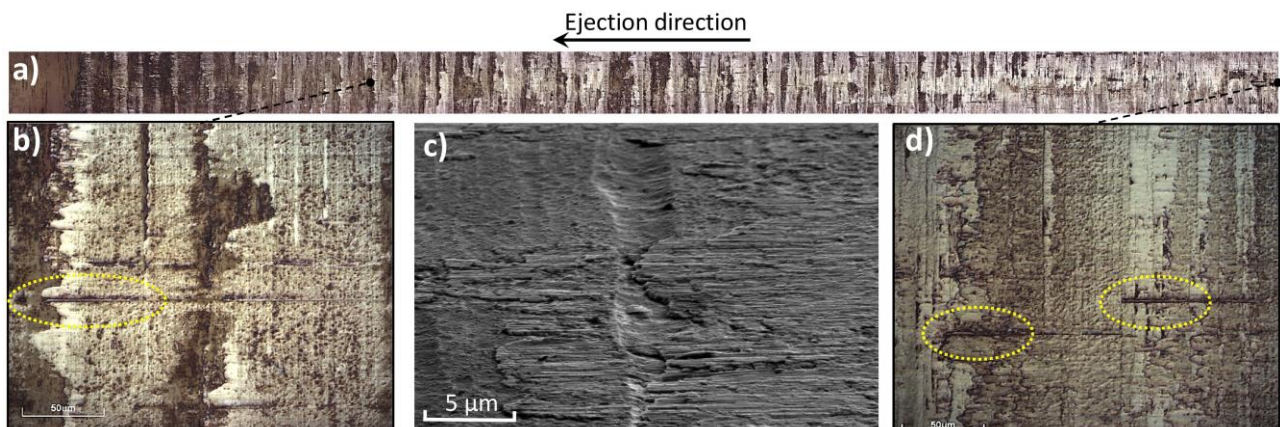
Surface of CrN-H sample after the ejection test: a) CFM panorama view along the sample; b) detail of built-up on the pin 5 mm deep in the casting; c) SEM image of typical built-up in a grinding groove; d) CFM image of built-up in the location 20 mm deep in the casting; circled areas are nodular defects with agglomerated built-up
